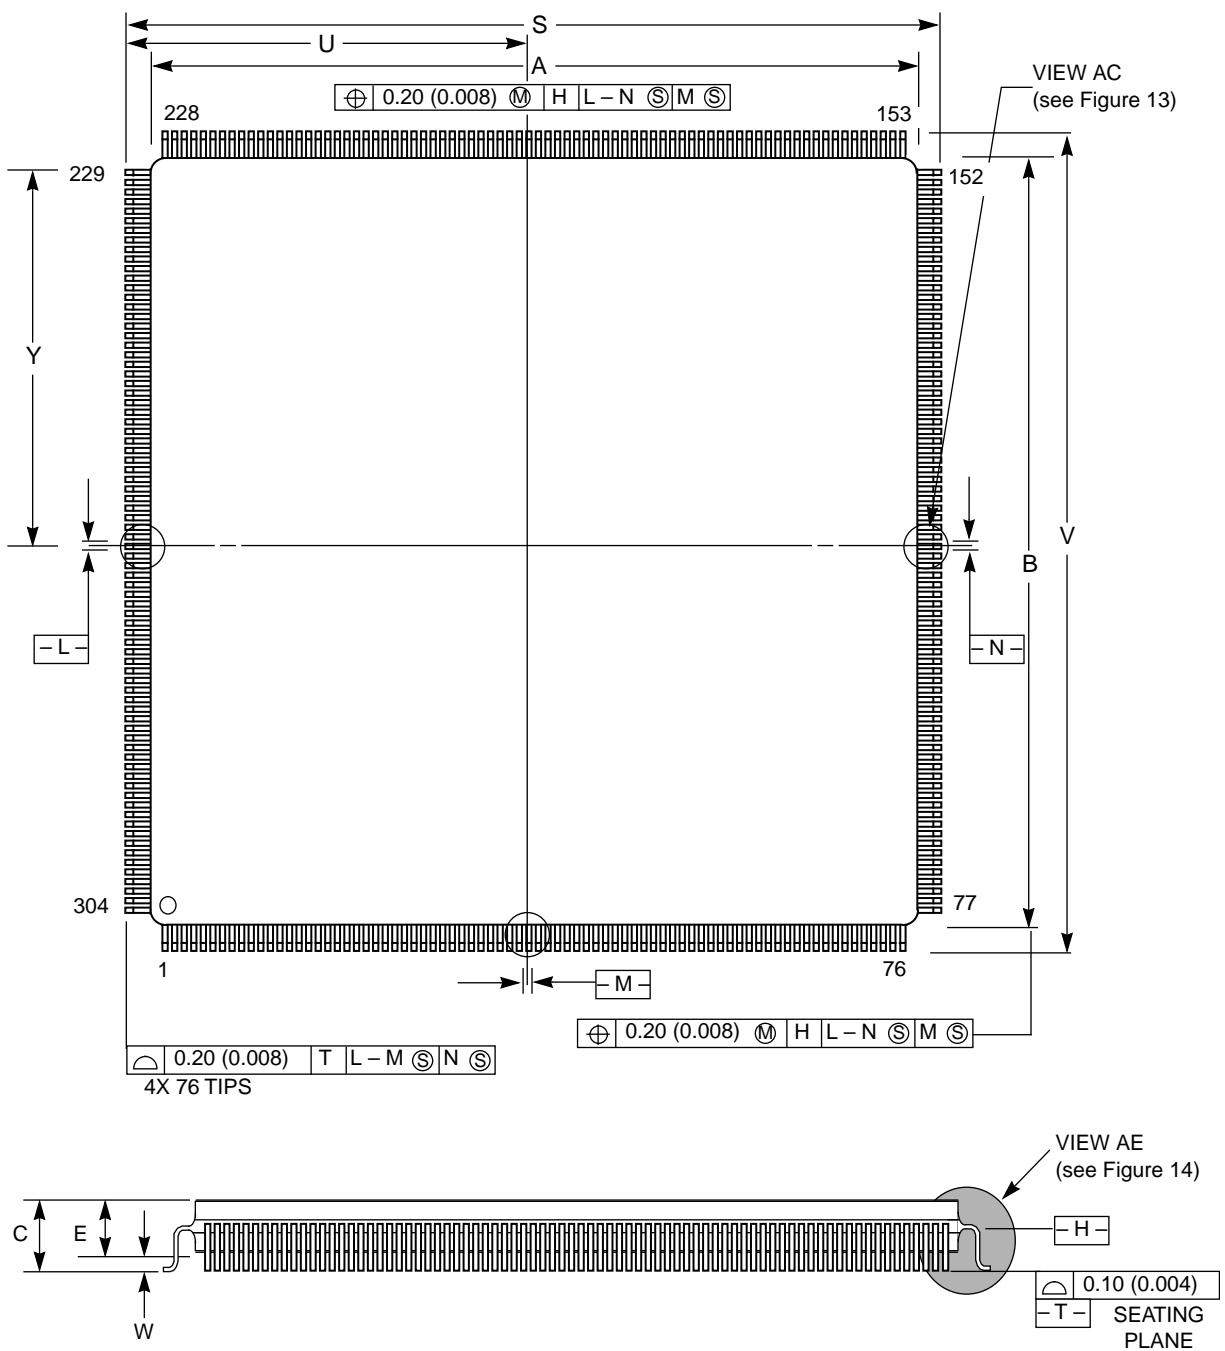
Mechanical Dimensions of the Wire-Bond CQFP Package
